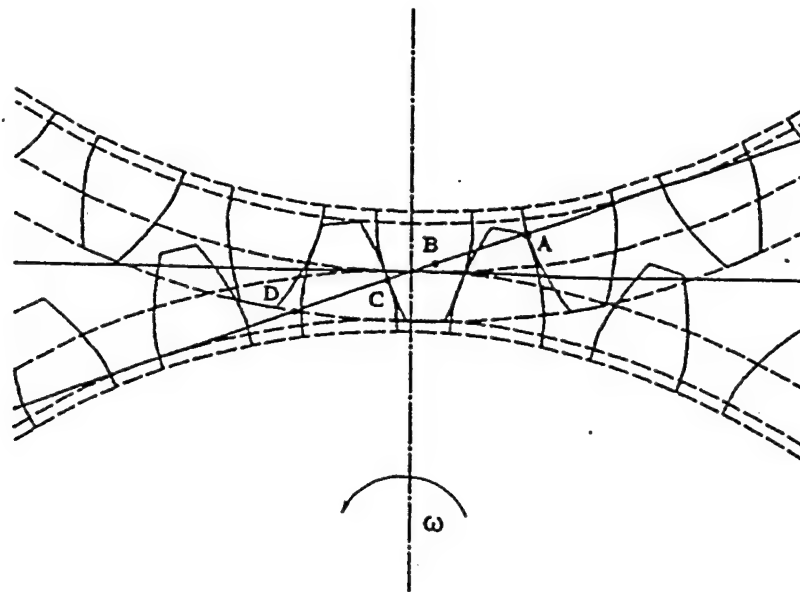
(a) Tooth contact in low-contact-ratio gear
